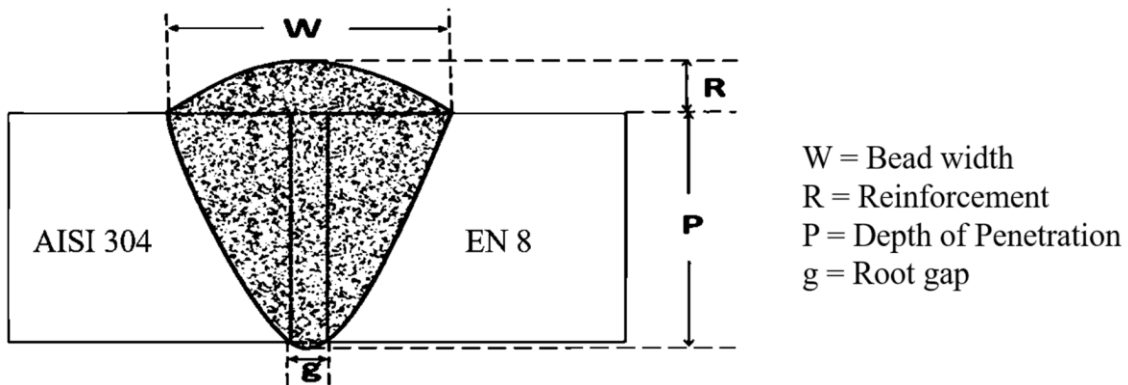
Schematic diagram of weld bead geometry
